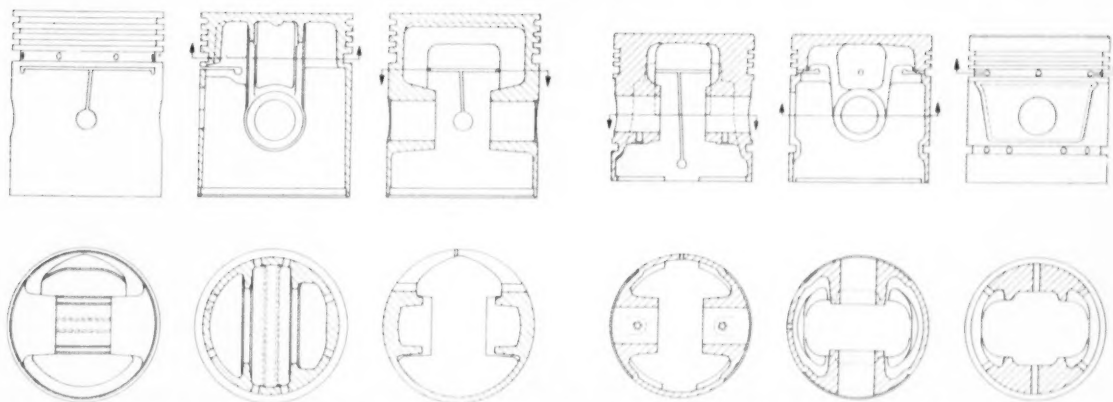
Specialized slotted pistons for the 79.37 mm bore Willys Overland (left) and the 73.5 mm. bore Morris Commercial petrol engine (right)
